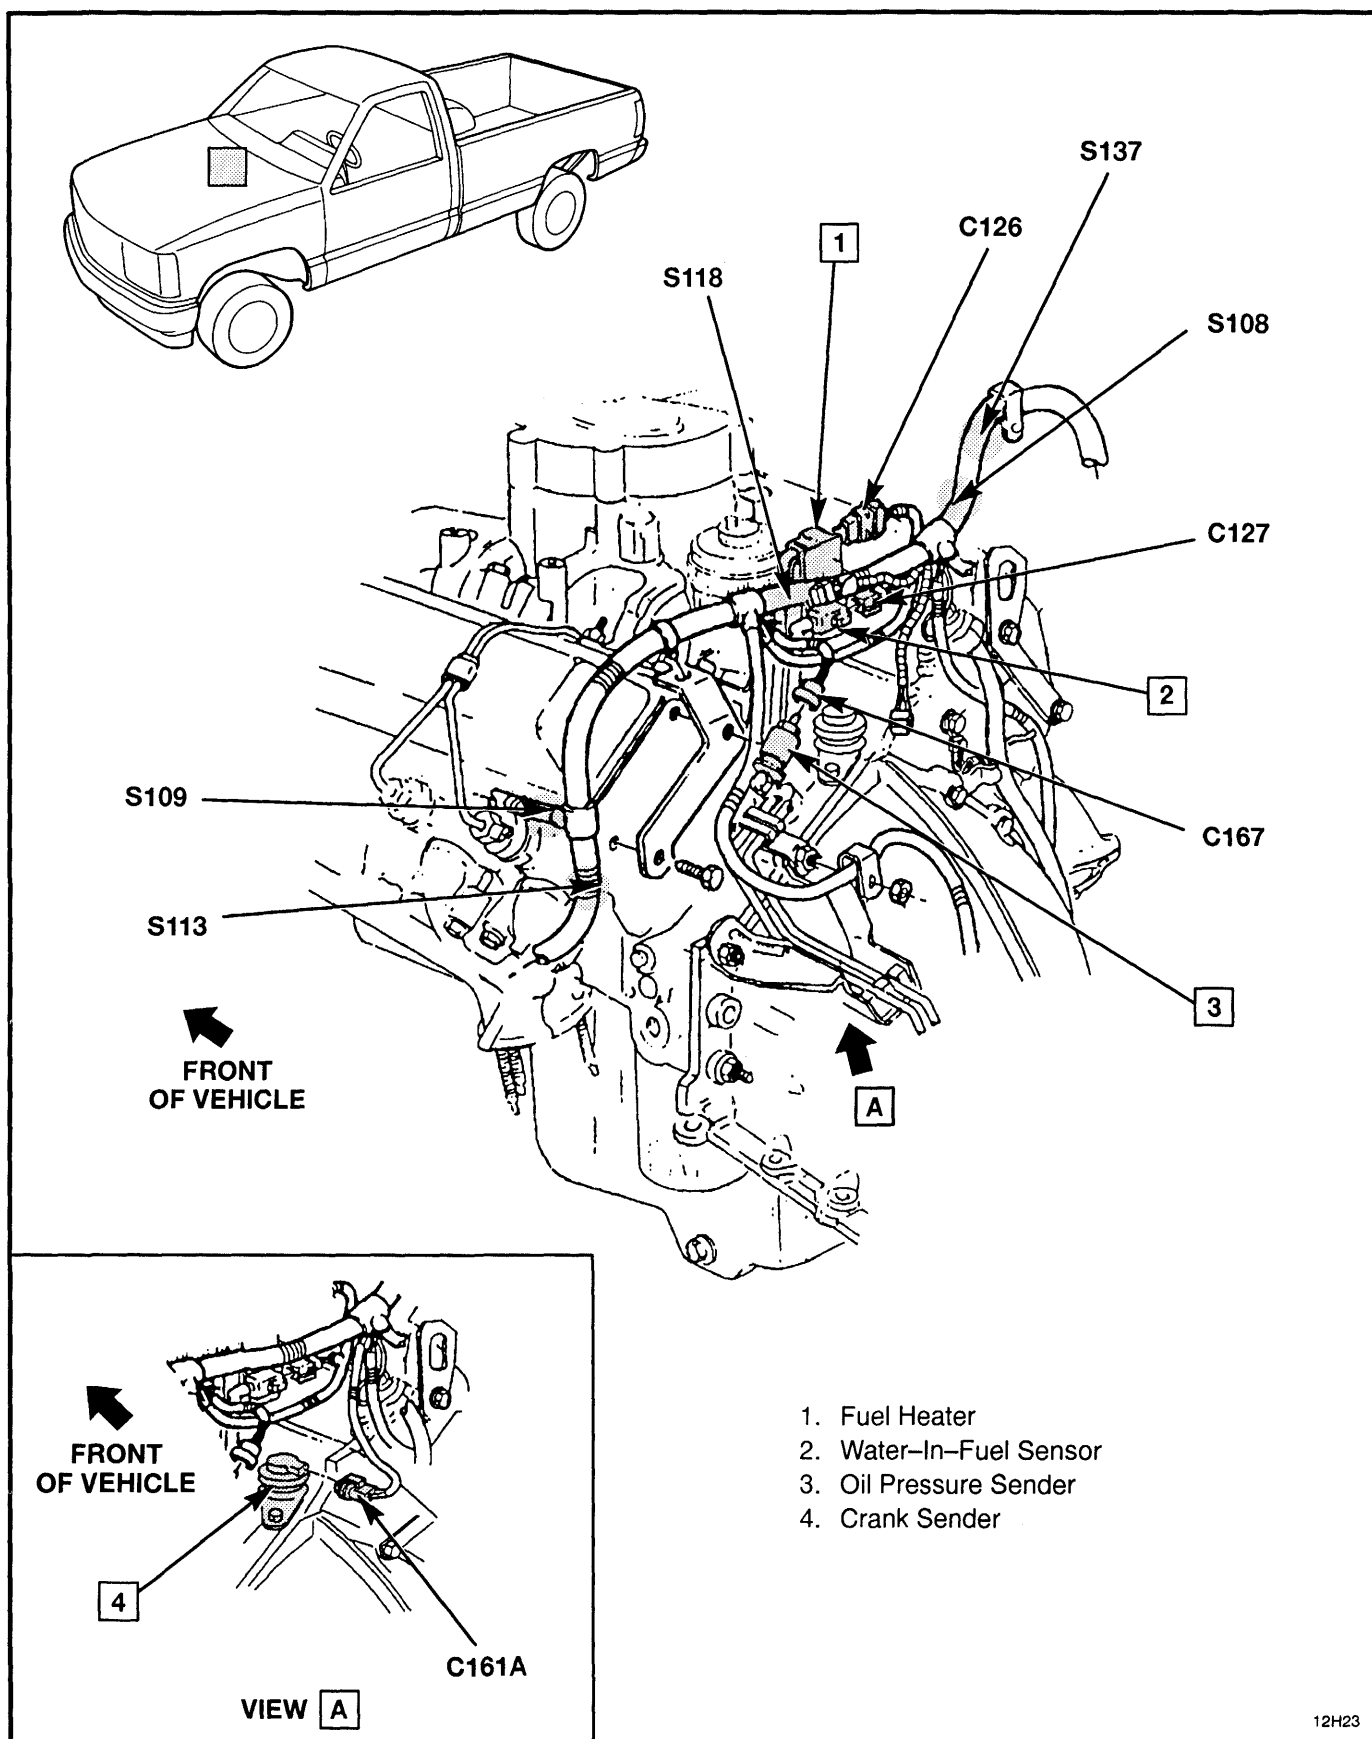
6.5L Diesel Engine Wiring, Rear
